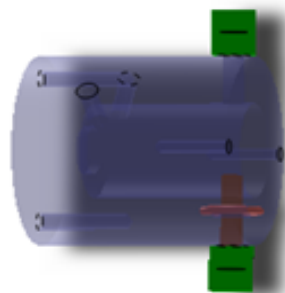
CAD model of the holder: The reservoir for addition/removal of the contrast agent; the static seal consisting of an O-Ring and a rod is additionally illustrated.
